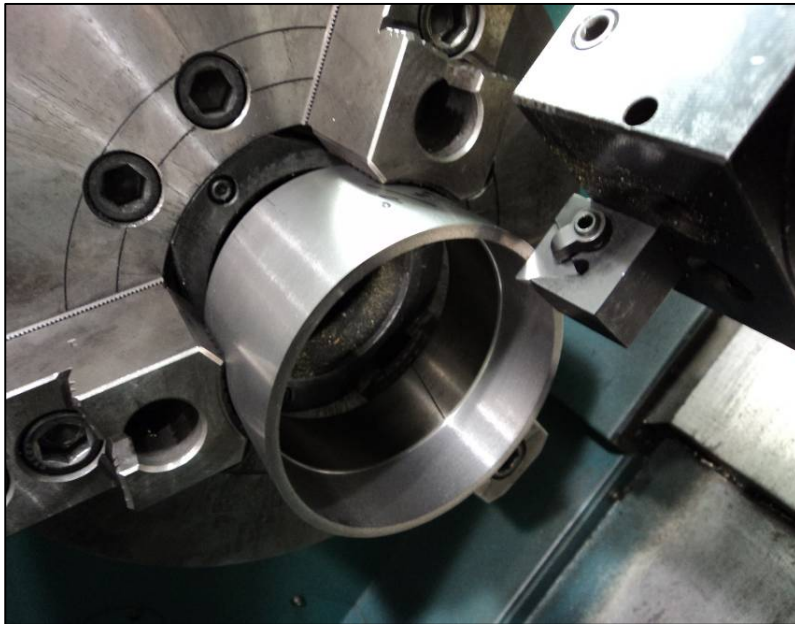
Test configuration with the cutting tool mounted on the dynamometer
